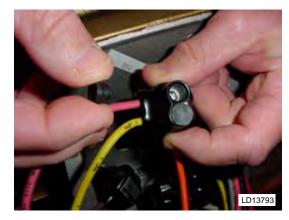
ASSEMBLY OF CONNECTORS
